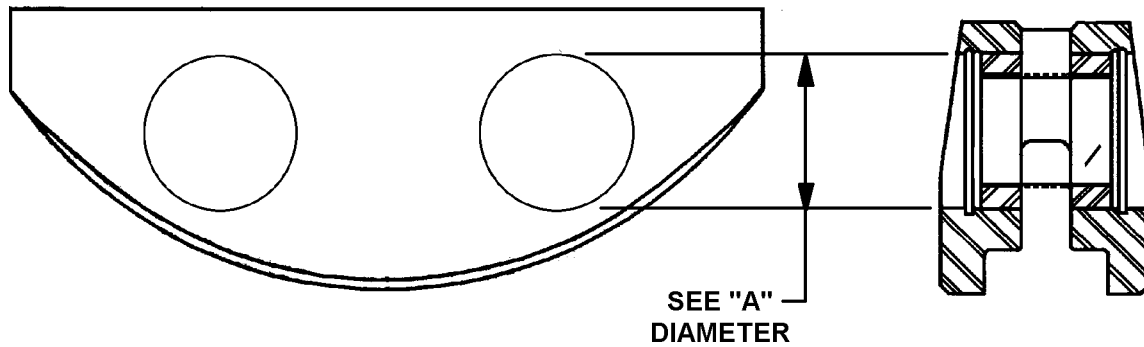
COUNTERWEIGHT BUSHING BORE INSPECTION
